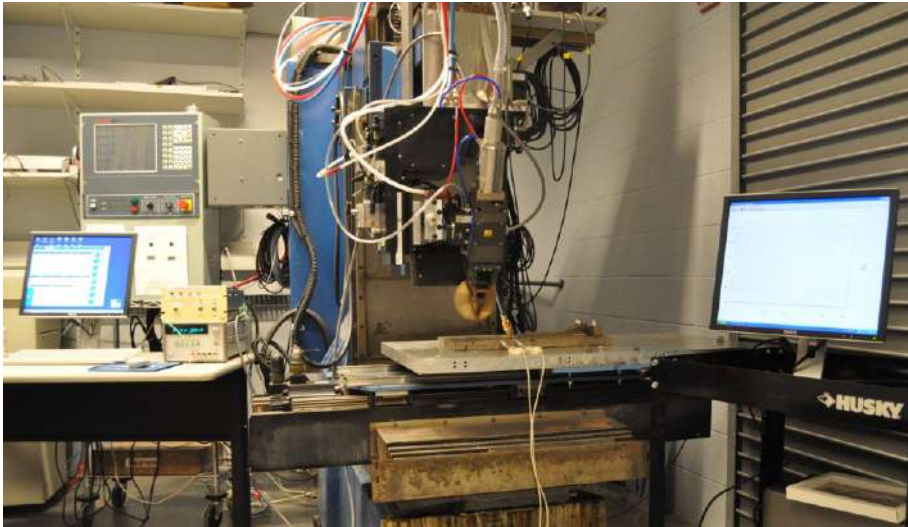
Laser welding of galvanized steel for a lap joint configuration with a pressure wheel control system
